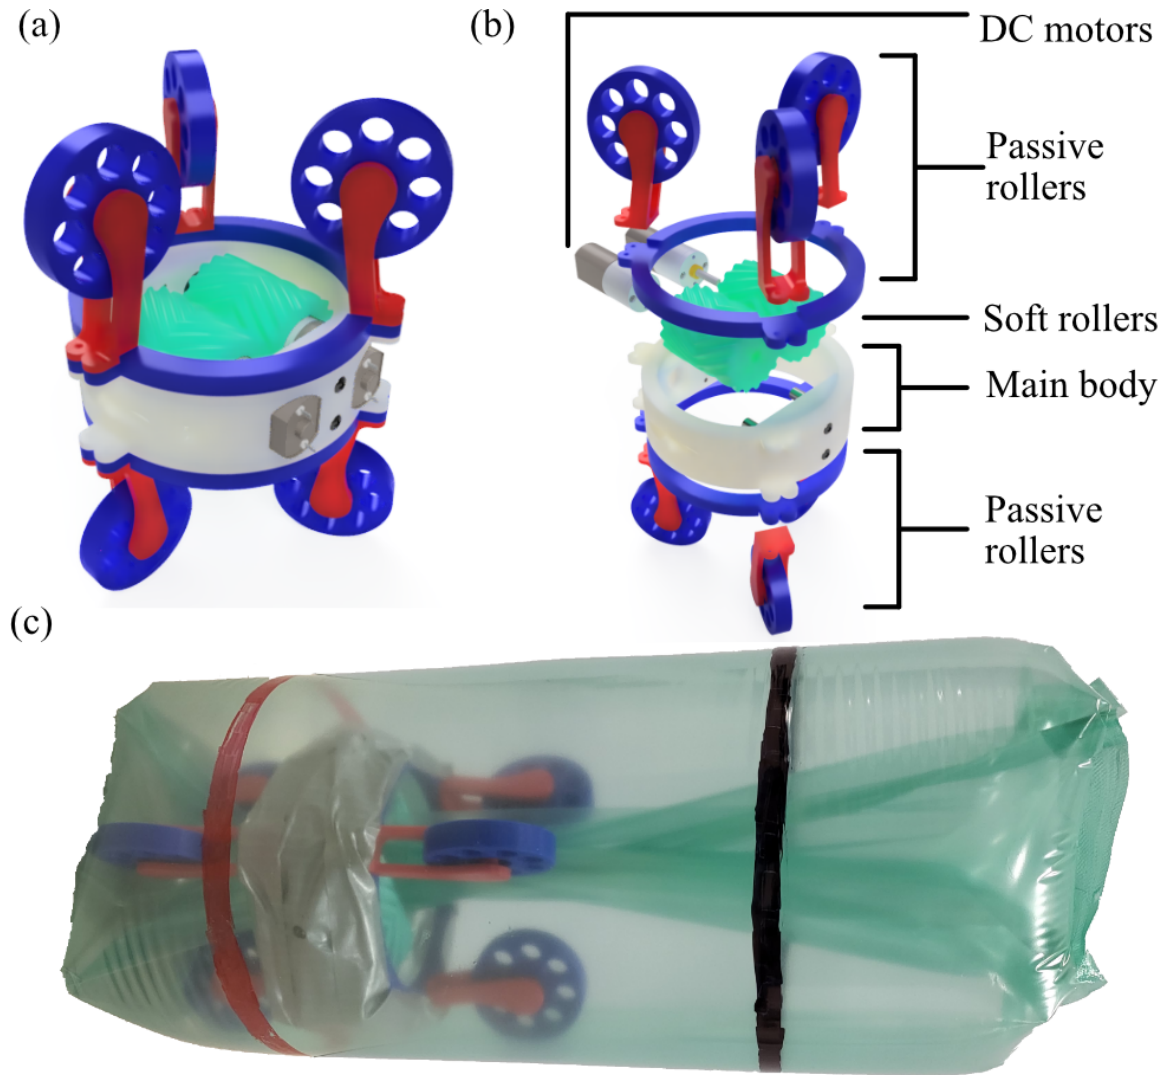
(a) CAD rendering of the assembled everting mechanism. (b) Exploded isometric view of the everting mechanism. (c) Photo of the fully assembled robot.
